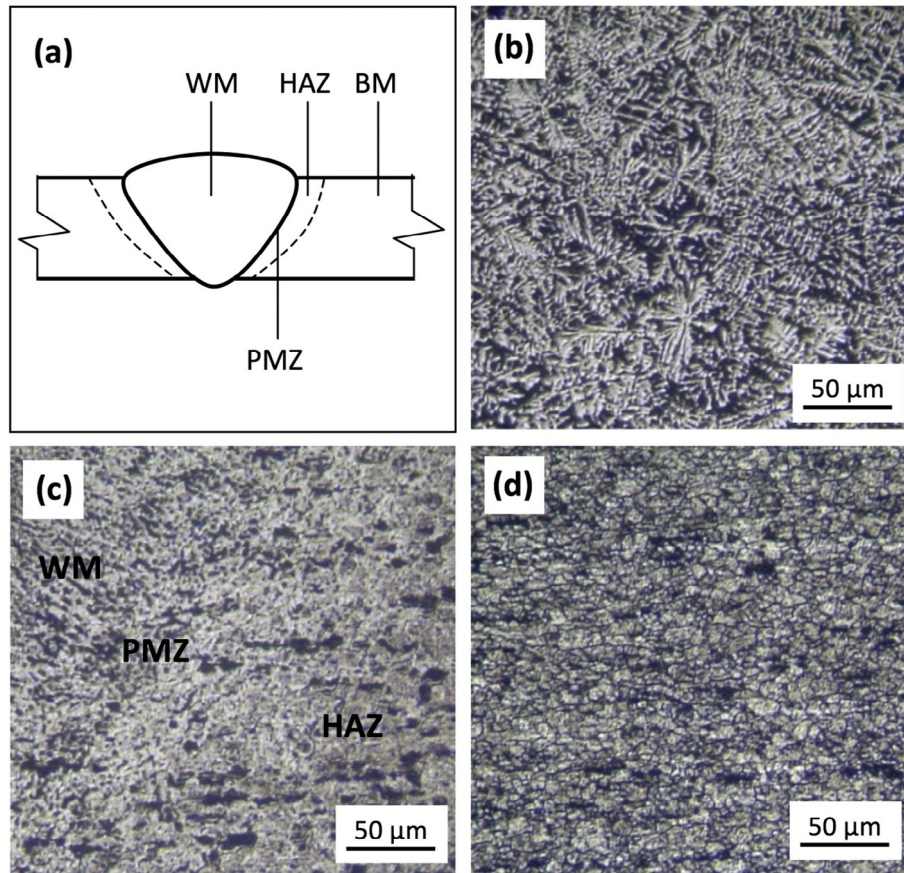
(a) A weld profile with the corresponding microstructures: (b) weld metal (WM), (c) partially melted zone (PMZ)-heat affected zone (HAZ), and (d) base metal (BM) in as welded MIG 5083 aluminium alloy weld joint.
